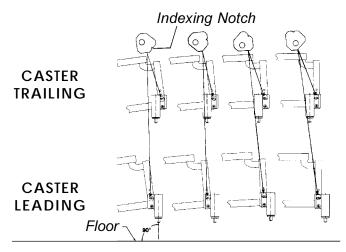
ADJUSTING FRONT CASTER HEADTUBES - PRO-SA MODEL WHEELCHAIRS
